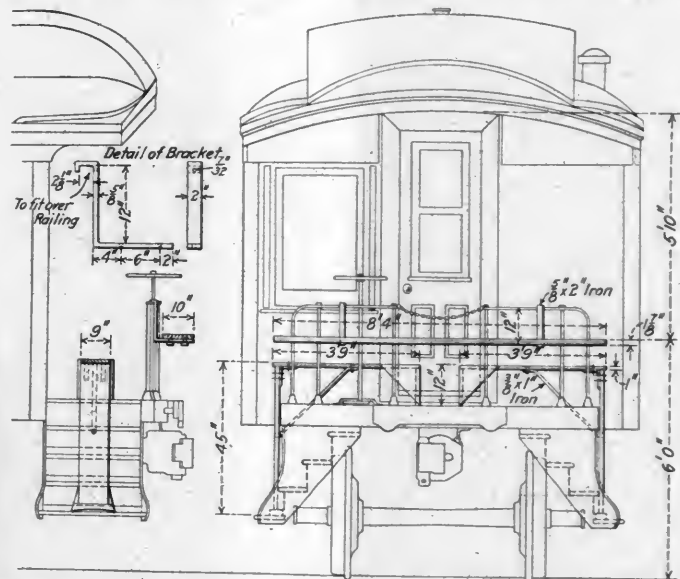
Auxiliary Staging for Painting Ends of Passenger Coaches
